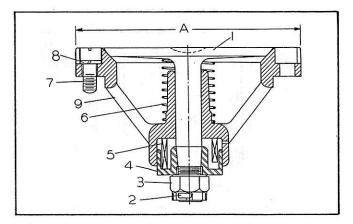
Suction Valve, Single Style, Y-35 Type, 6" x 6" Compressors
